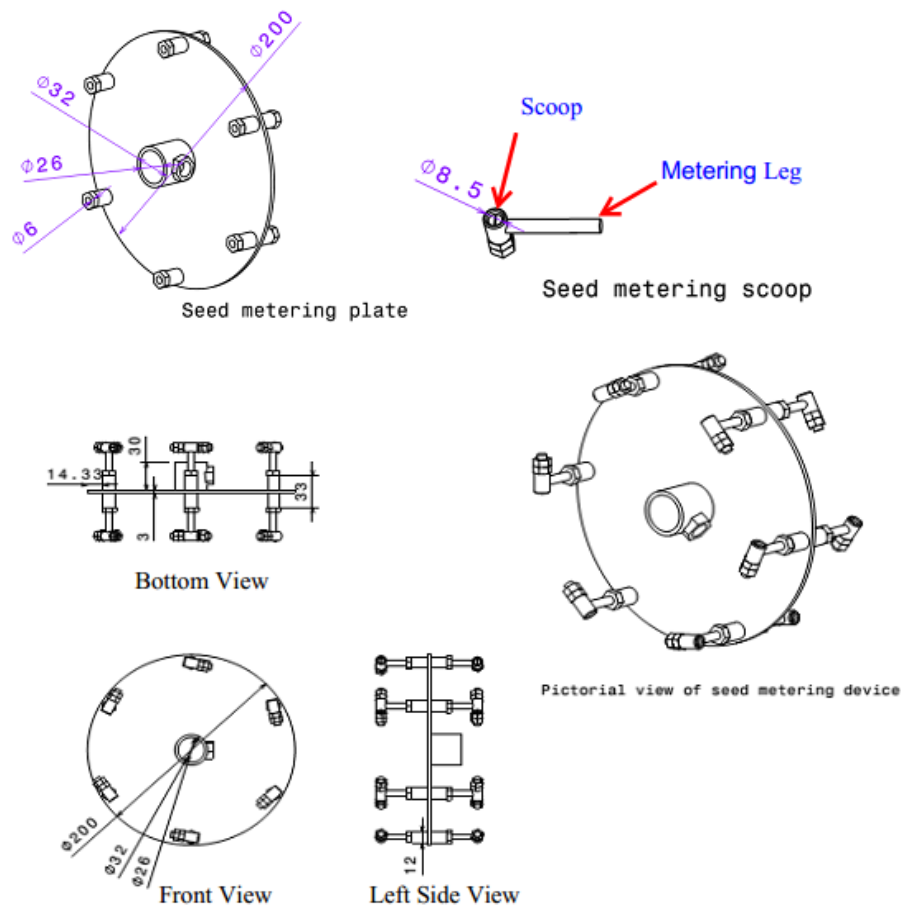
Seed metering device of the prototype planter (dimensions are in mm).
